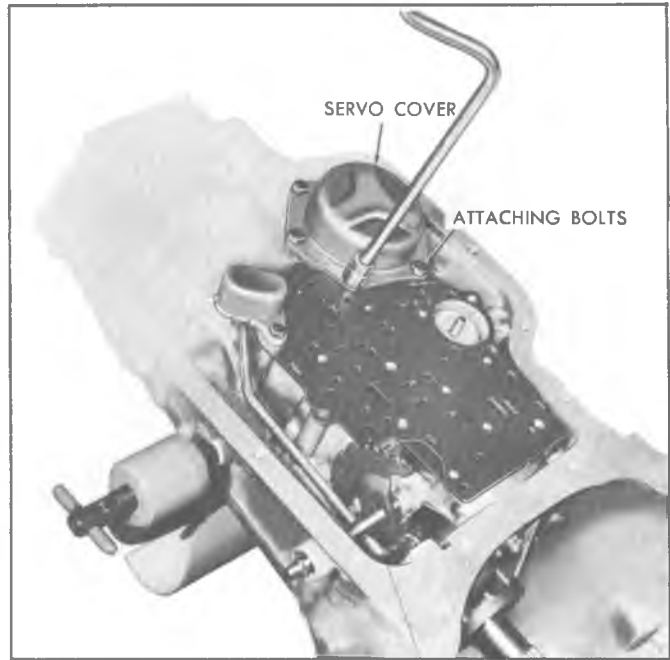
T—Removing Rear Servo Cover Attaching Bolts
